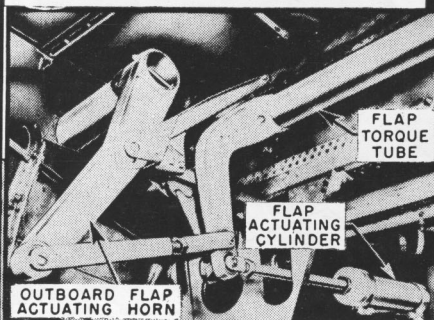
Flap installation, showing details of the emergency lowering mechanism.
